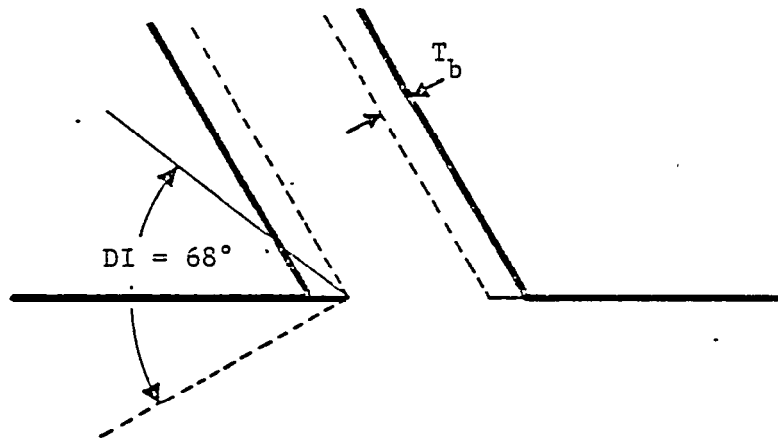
Maximum Allowable Bevel Angle DI in a Welded Pipe Joint.
